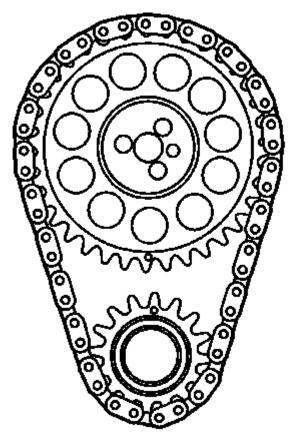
View Of Camshaft & Crankshaft Sprocket Timing Marks Courtesy of GENERAL MOTORS CORP.
